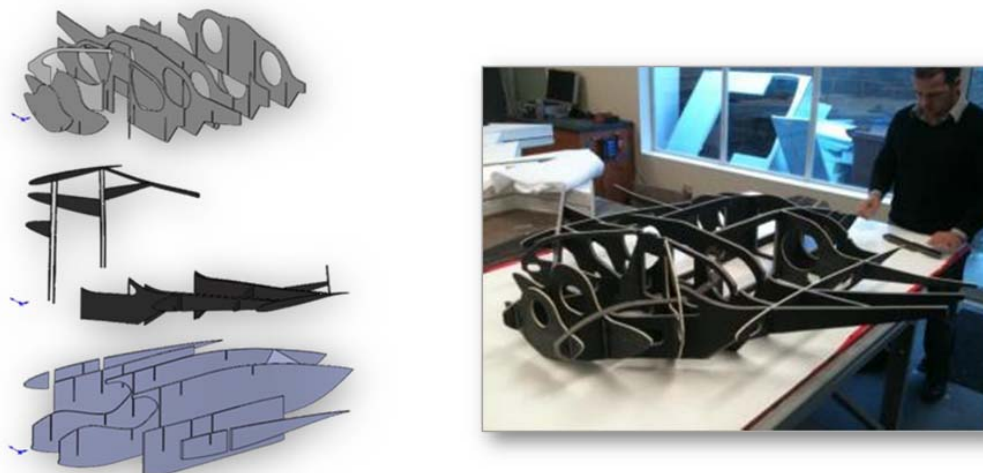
Exploded View Showing Interlocking Components of the Fuselage Design (Left) Final Product (Right)⁸
